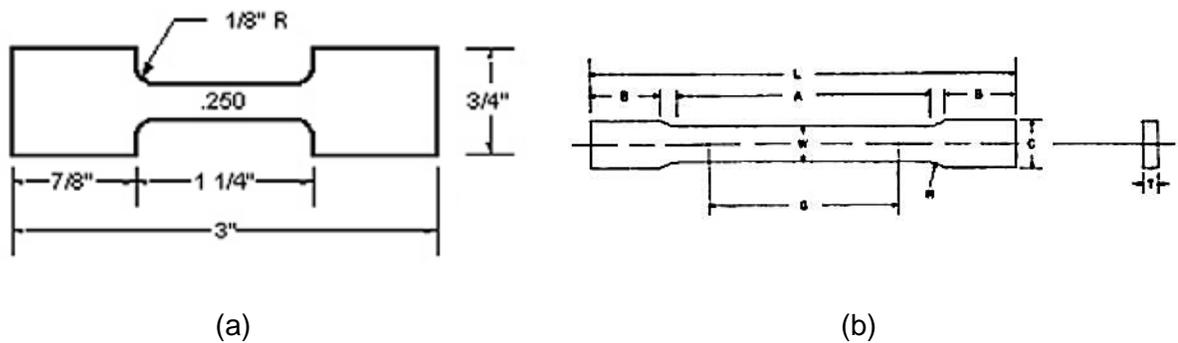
(a) Dimensions of the tensile specimens evaluated at Northwestern University. (b) Dimensions of the standard ASTM A370 plate-type tensile specimens evaluated at IL DOT, where  $L = 12"$ ,  $B = 3"$ ,  $W = 1.5"$ ,  $R = 0.5"$ ,  $C = 2"$ ,  $G = 2"$ , and  $T =$  thickness of the steel plate or sheet.
